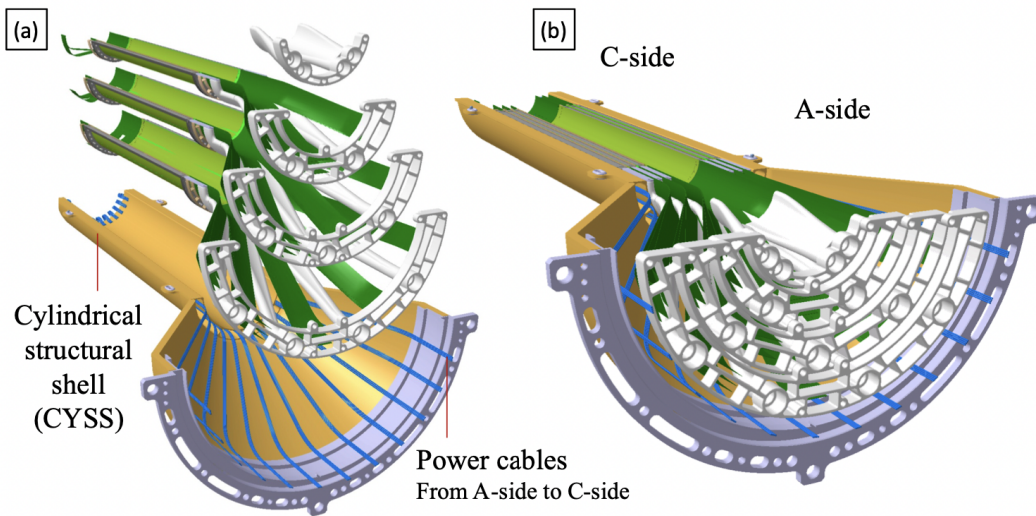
Half-detector: (a) Exploded and (b) assembled view. Taken from [42].
